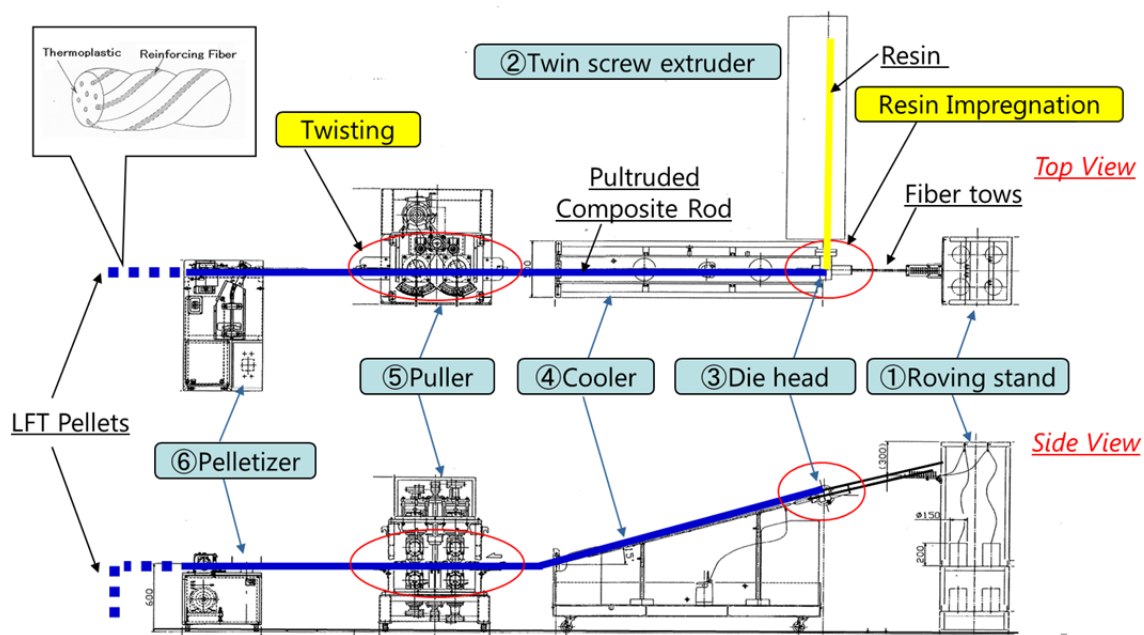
The diagram of KOBE STEEL's LFT production machine.
